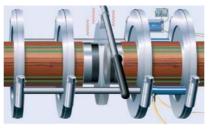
Welding in accordance with DVS 2207, Part 1
